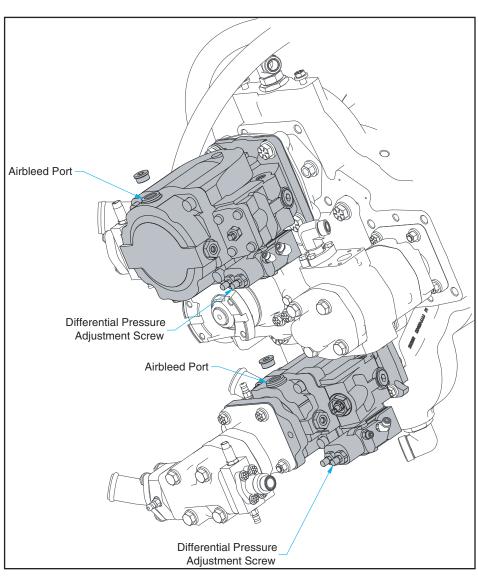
Typical Power Unit With Parker P3 Piston Pumps
